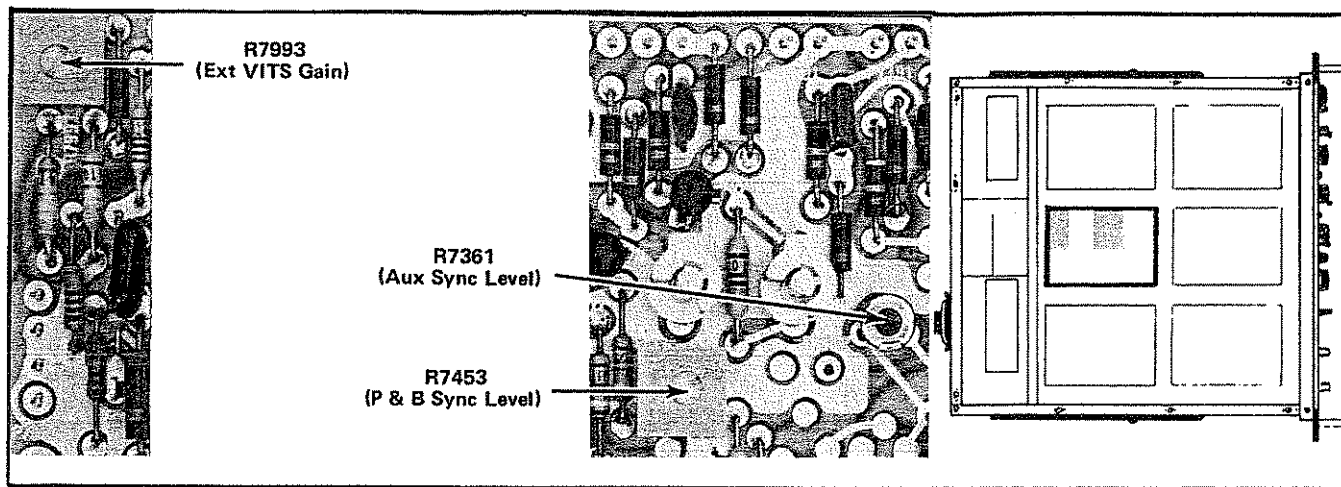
Auxiliary Sync level and external VITS gain adjustment location.
